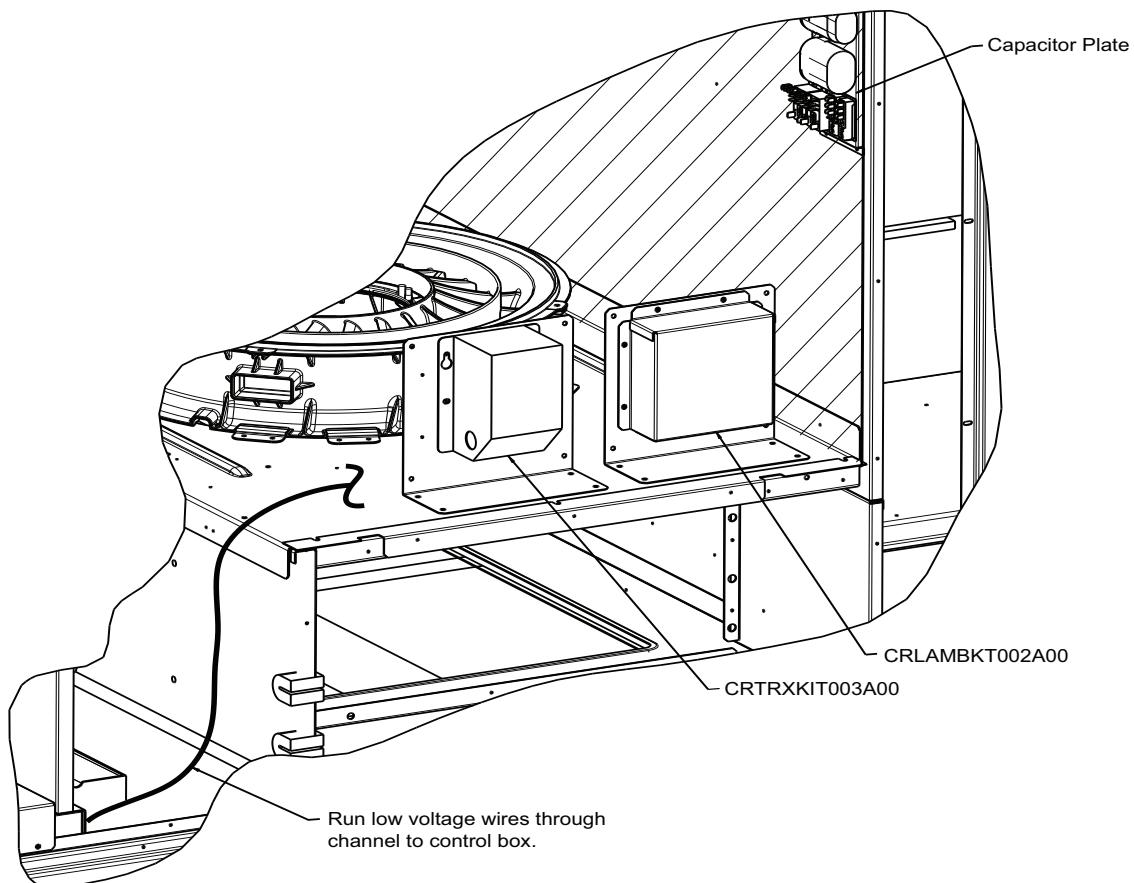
Cabinet C — Controller and Transformer Installation Locations
